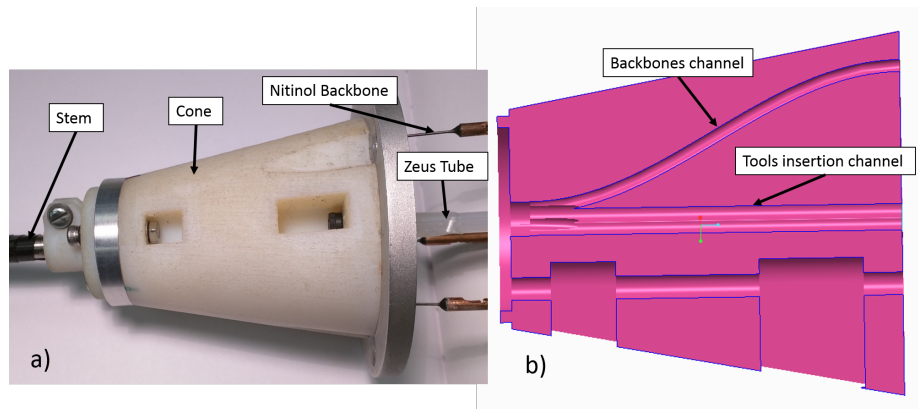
Actuation cone: (a) assembly, (b) cross section
